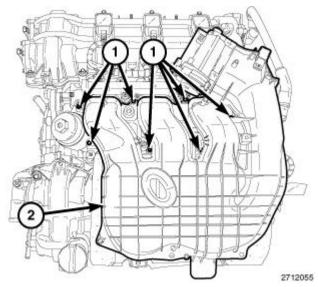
Upper Intake Manifold & Bolts Courtesy of CHRYSLER GROUP, LLC
